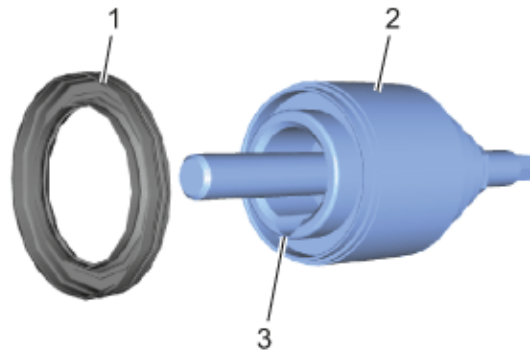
Crankshaft Front Oil Seal And Installer Tool (Second Design)
